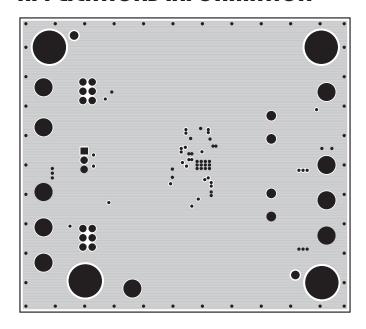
LTC3128 Evaluation Board Layer 2 Metal
